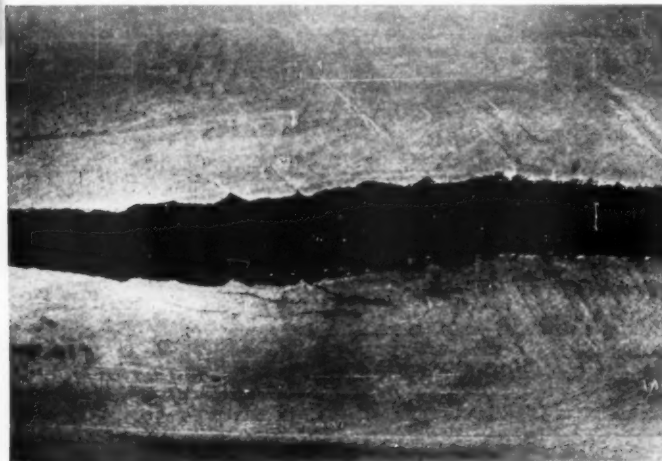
A "reeler spinner" (mill defect) which failed at 3,200-psi. pressure.
